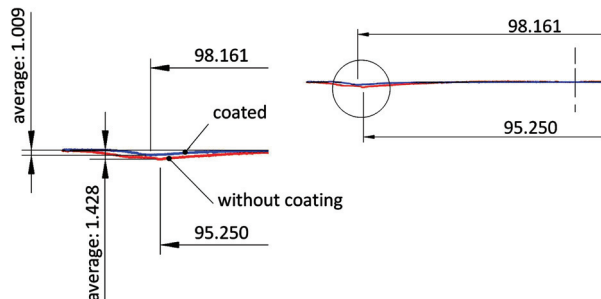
Wear mark of the pressure plates coated and without coating after 26.000 pre-upsetting cycles were completed on each [5]
